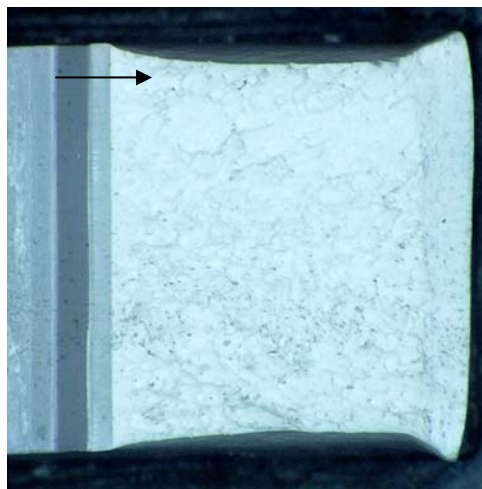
Macrofractographs at 50°C for different crosshead speeds.
